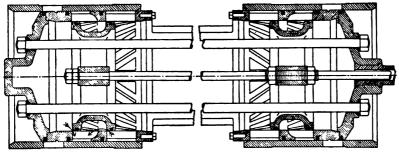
Double Piston-valves, for 44"×48" Cylinder of Rolling-mill Engine— Wm. Tod Company. Scale 1 to 18.
